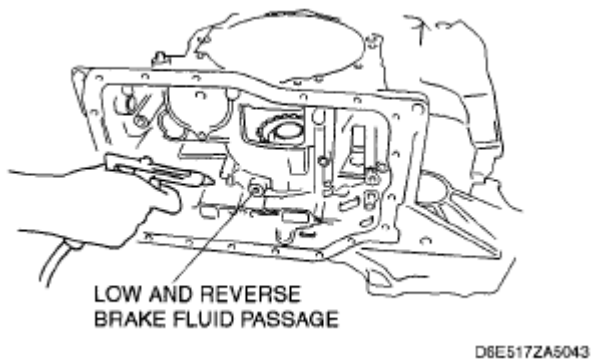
Applying Compressed Air To Low And Reverse Brake Fluid Passage
